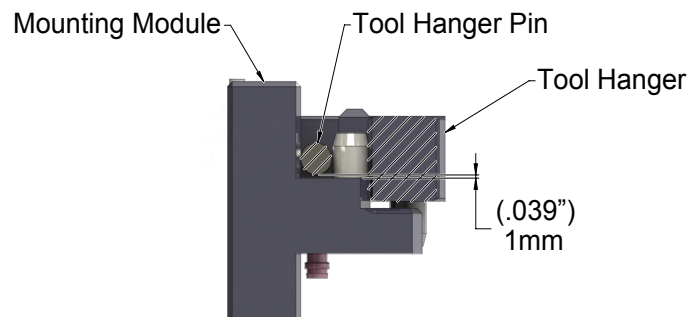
Proper Clearance for V-Block Tool Drop-off
